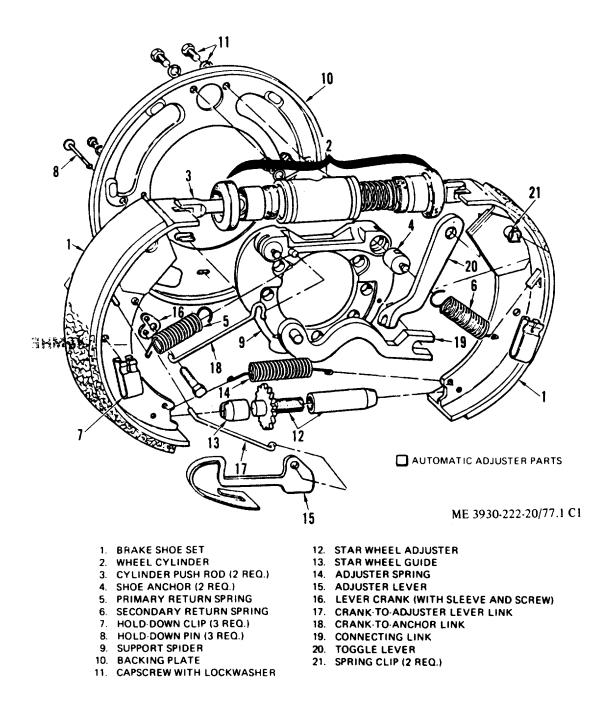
Brake shoe assemble, exploded view (Army Model MHE 223).
